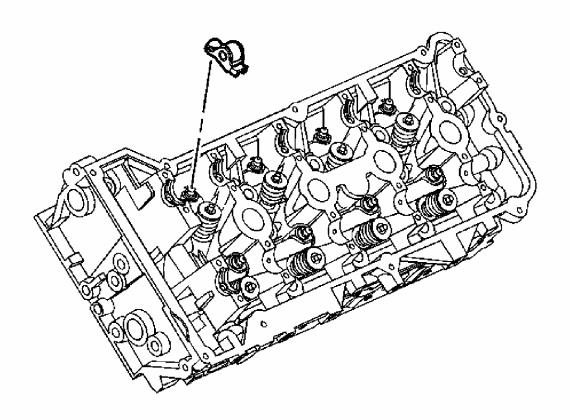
Identifying Camshaft Followers Courtesy of GENERAL MOTORS CORP.
